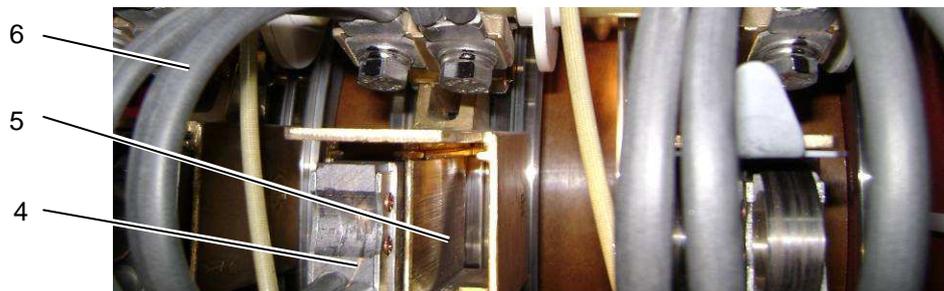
5 Brush holder box (example: VEM)
